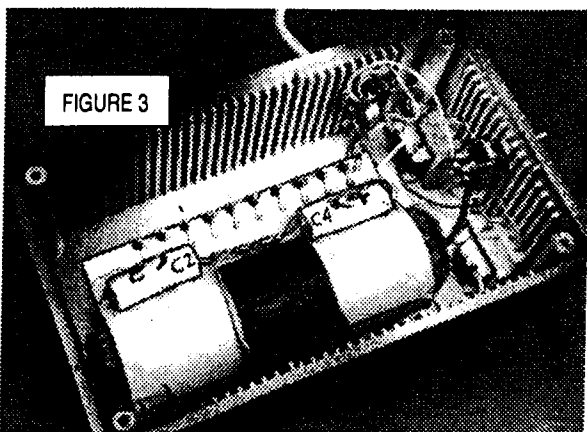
The assembled filter is shown installed in a Jameco H2851 plastic box.
